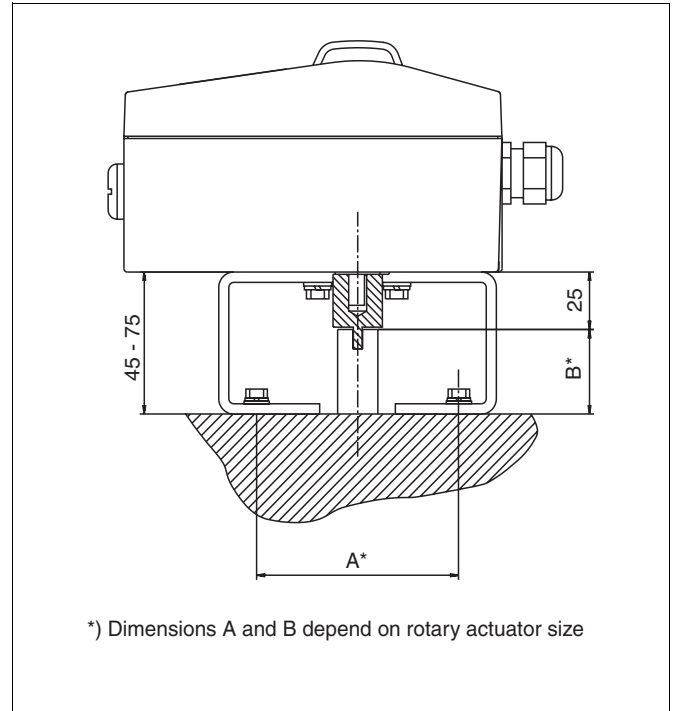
Mounting to rotary actuators to VDI/VDE 3845
